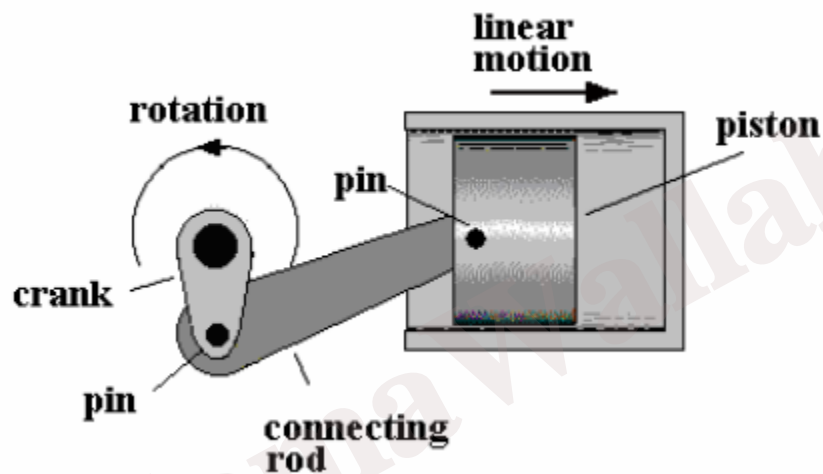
A good example is a crank, connecting rod and piston mechanism
